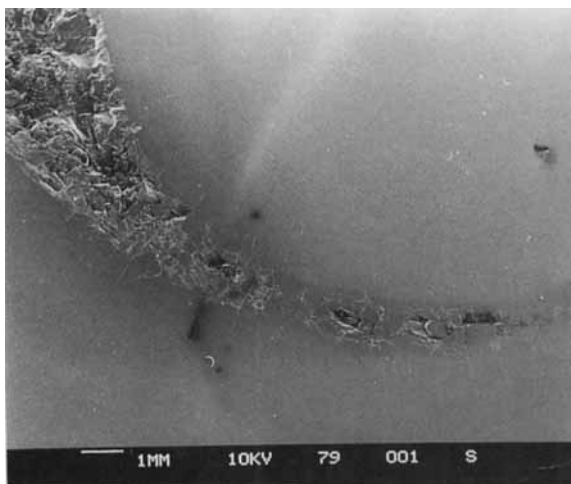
Details of cracks shown in Figure 6 but at higher magnification.
